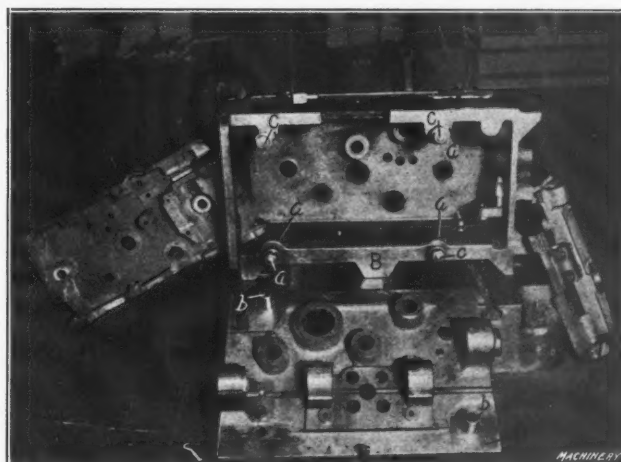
Closer View of Apron Jig shown in Fig. 2, with Work Removed
